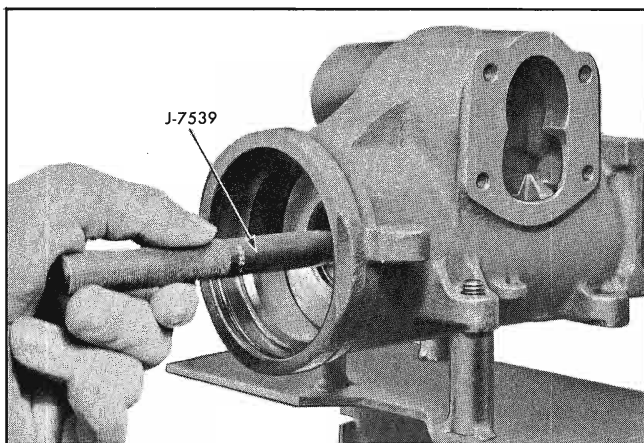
A-9 Arbor J-7539 Against End of Steering Worm
